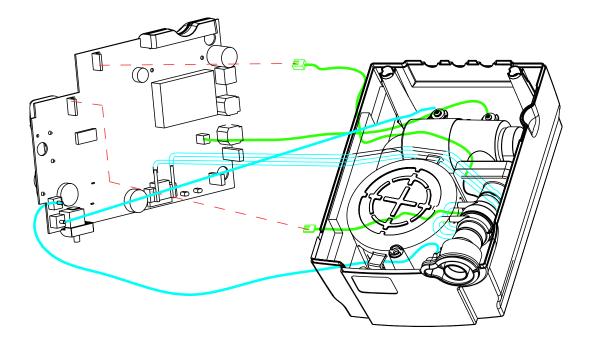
FIGURE E: REMOVAL AND INSTALLATION OF THE MAIN PRINTED CIRCUIT ASSEMBLY
